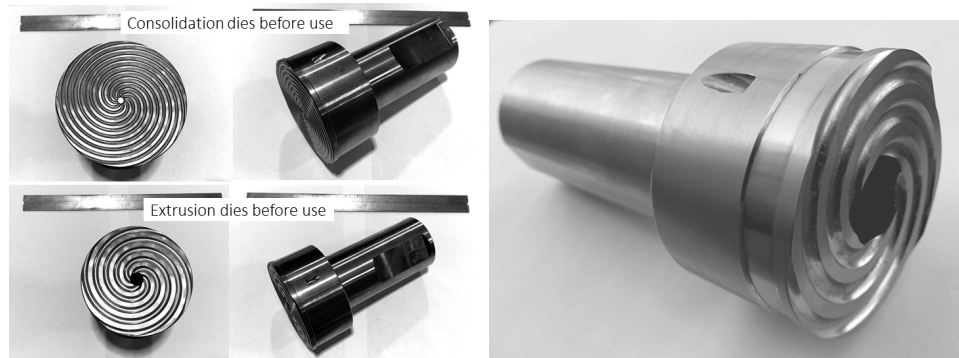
Extrusion tools designed for the project. Scrolled-face tool for powder consolidation and indirect extrusion.
